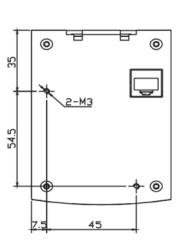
Dimensions of the inverter and placement of the mounting holes.
